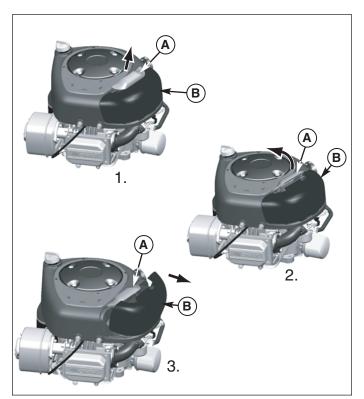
Air Filter Assembly - Briggs & Stratton Single Cylinder Models A. Air Filter Latch
